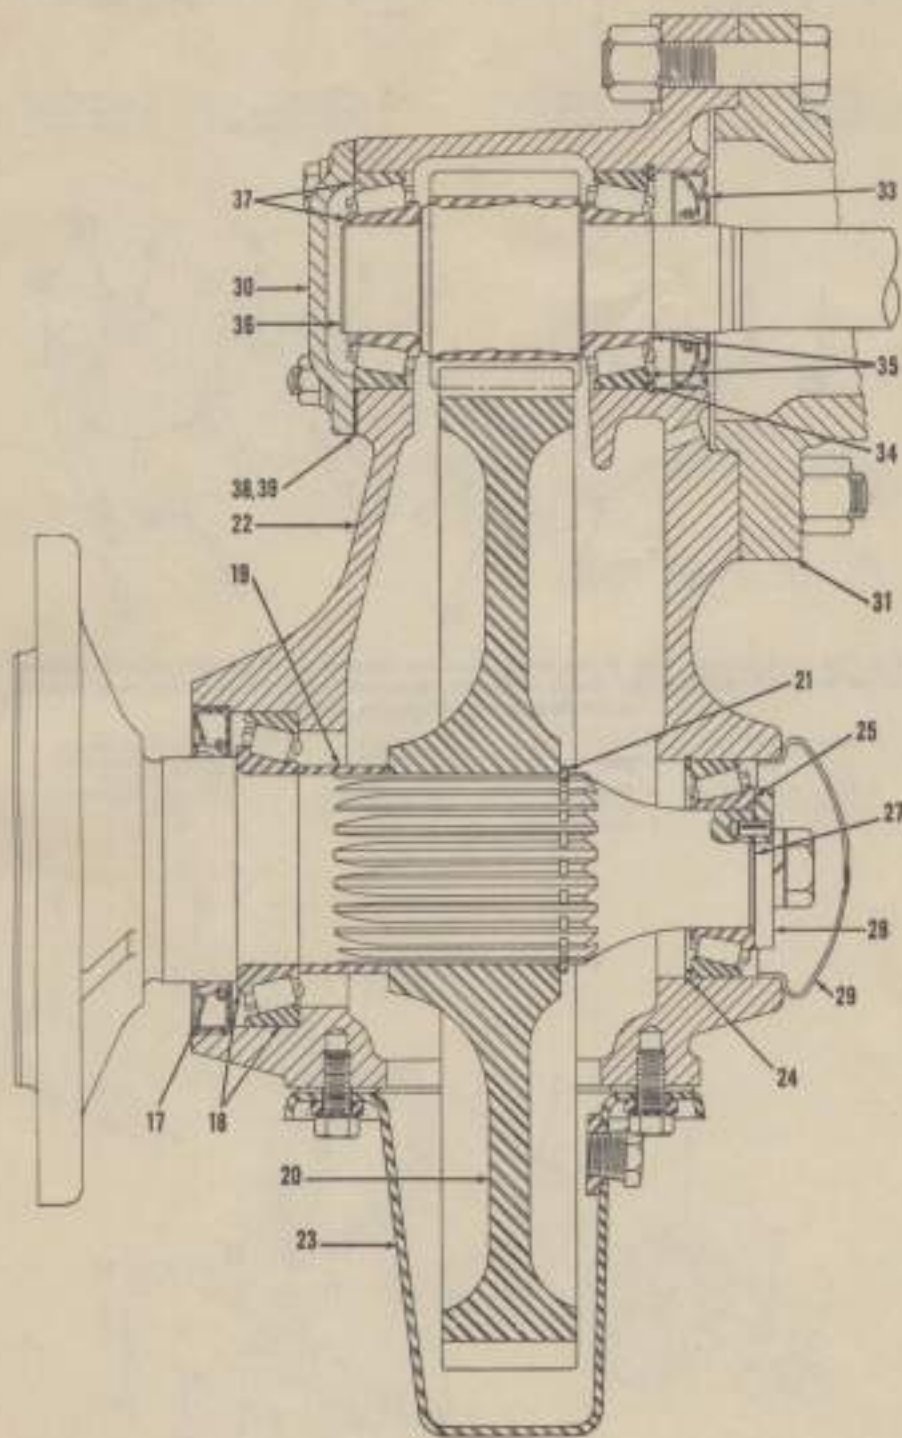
Cross-sectional view of the D-17 final drive unit. Refer to Fig. 122 for legend.
